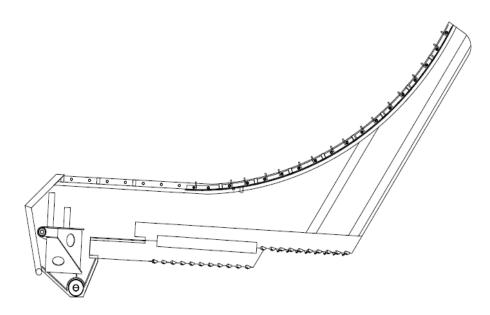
Jetting Blade - shown with upper & lower nozzle arrays (Sample)
